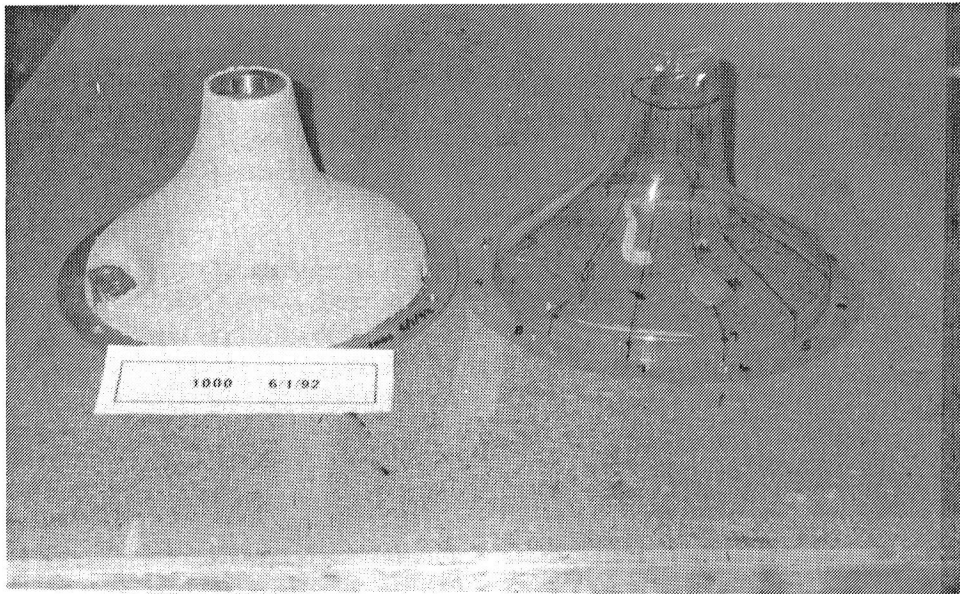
Insulated gasifier housing and marked mold liner for 1000 level drying shrinkage measurement.
